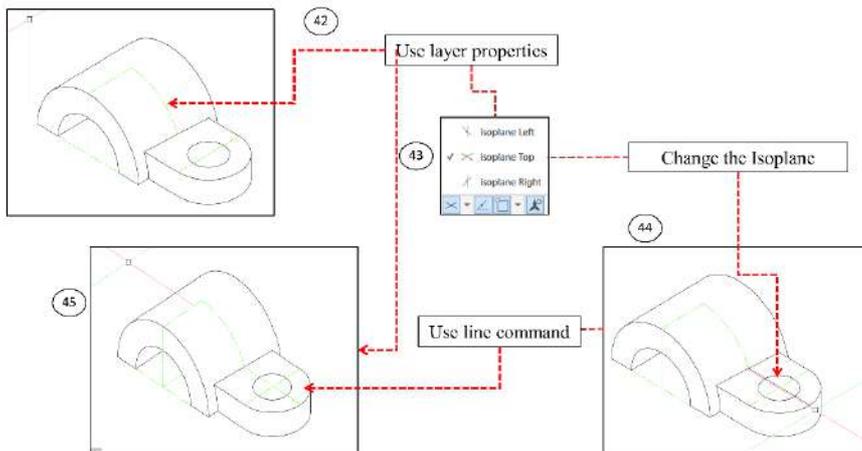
Example of an isometric drawing (Step 42, 43, 44 and 45)
